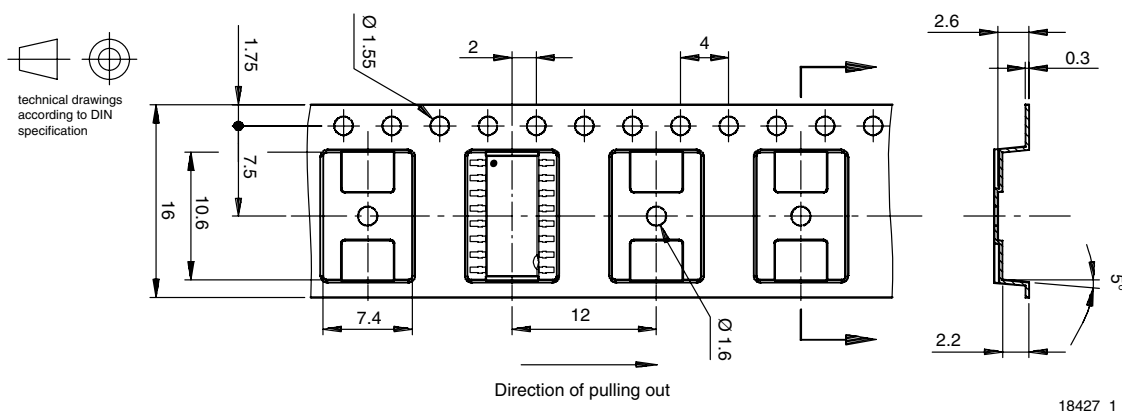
TTape and Reel Packing for TCMT460XT0 (2000 parts per reel)
